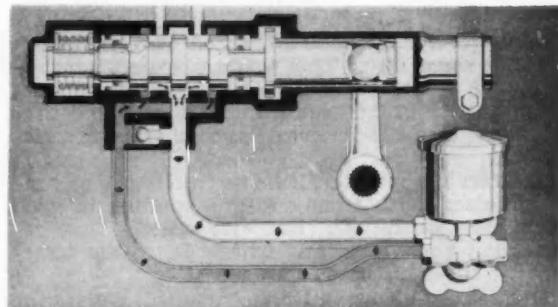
One way to design more feel and recovery into a power-steering system is to use a centering spring at the left-hand end of the control valve
